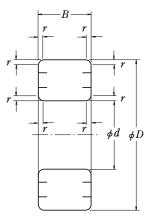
Boundary Dimensions of Radial Ball and Roller Bearings
